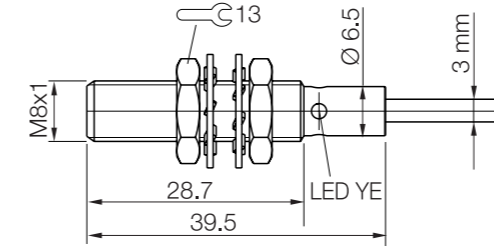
Dimensions BOS 08E-...-02. LED on the receiver
